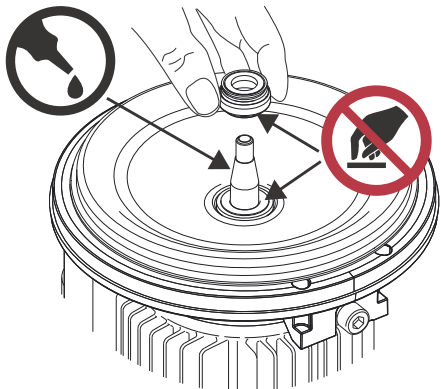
Lubricating the shaft and placing the rotating part of the shaft seal.
